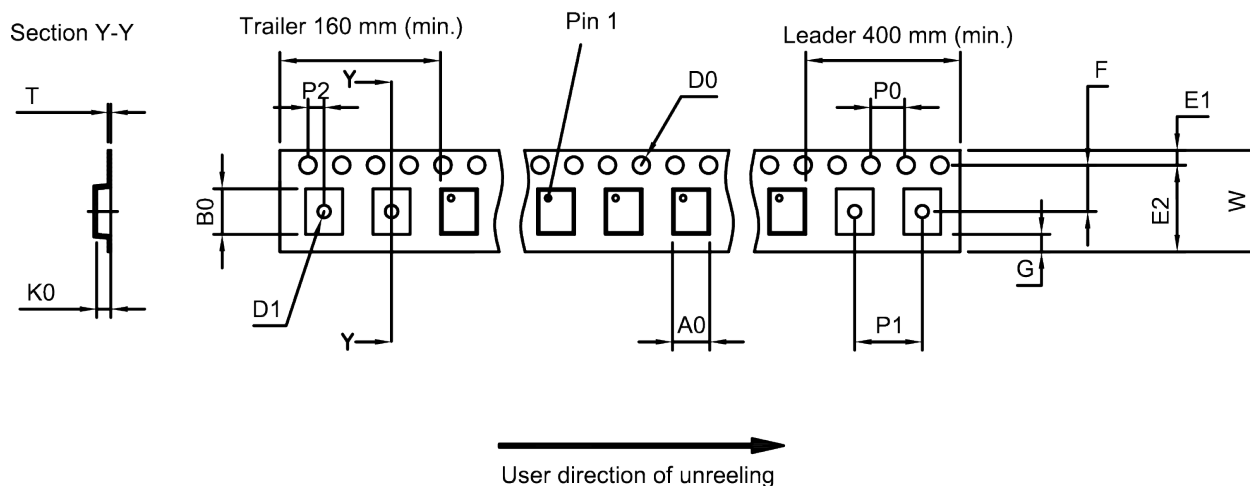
Drawing of tape (first-angle projection) with tape dimensions according to Table 1.
